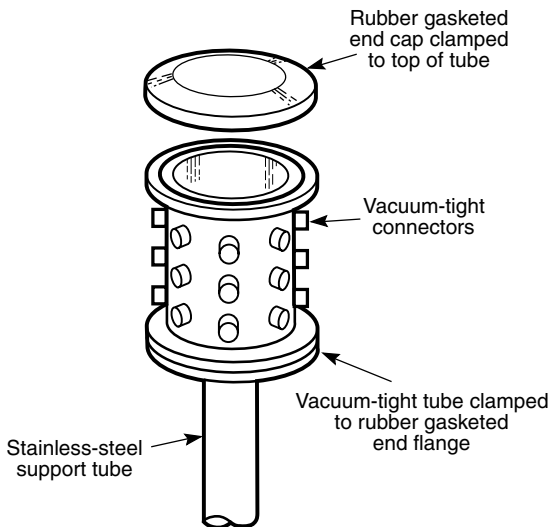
Vacuum-tight connector chamber (about 5–8 cm inside diameter) with removable cover, made from commercially available vacuum fixtures (Mendez 1988).
